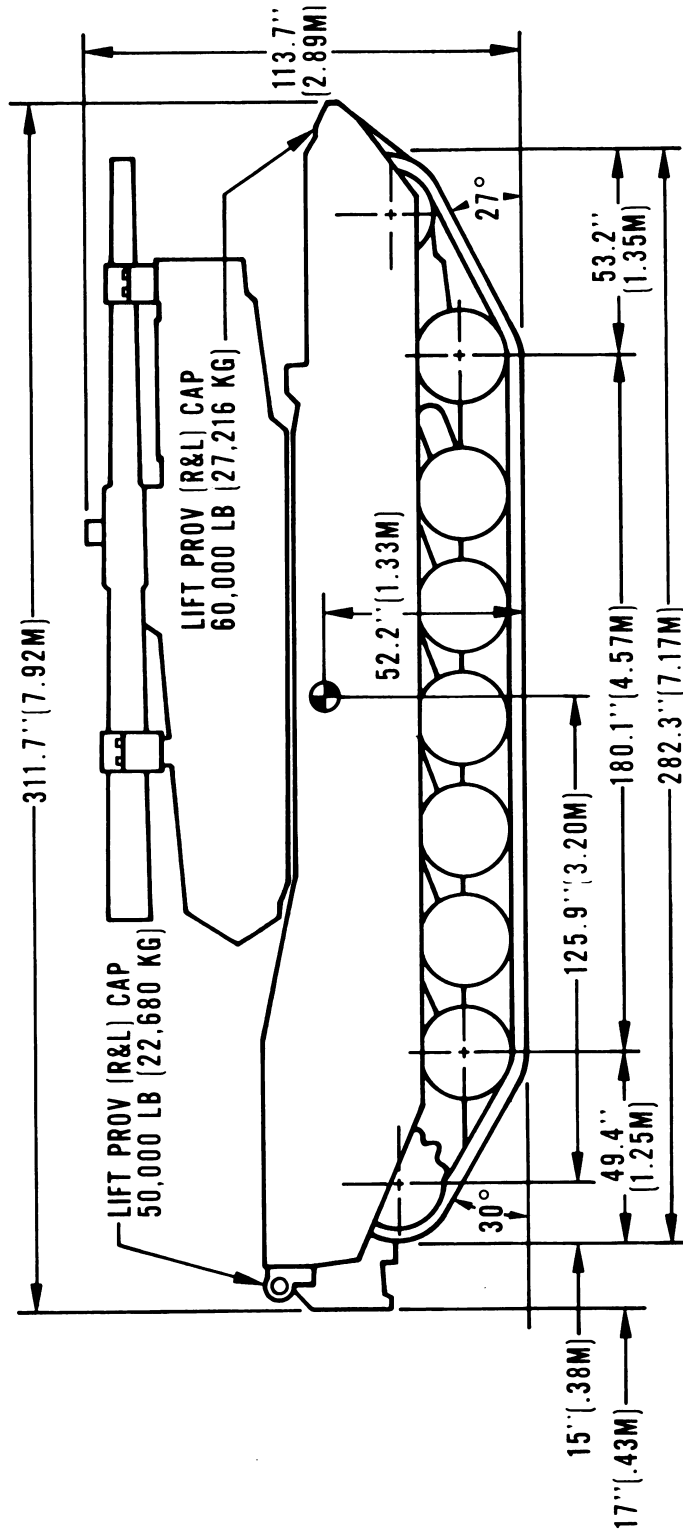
Transportability drawing, left-sided elevation, M1-series tank with gun tube removed and stowed on the turret.
